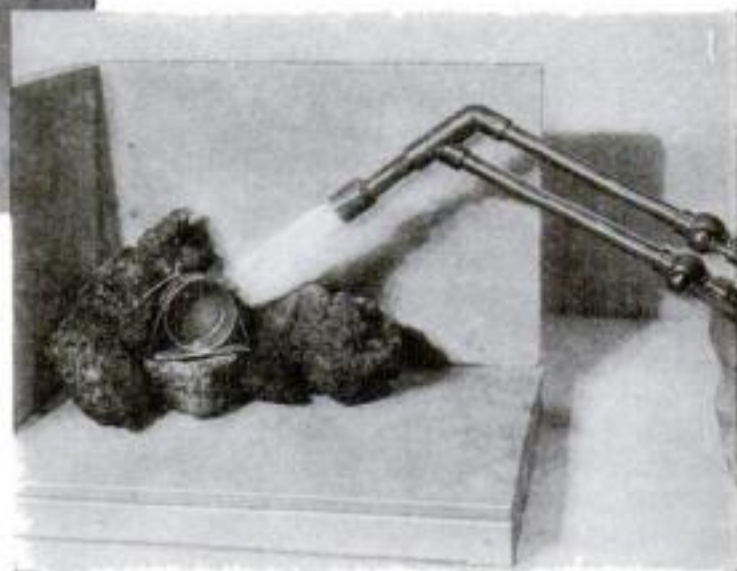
Using a blowtorch in soldering work that is supported and surrounded by charcoal in a soldering box.
